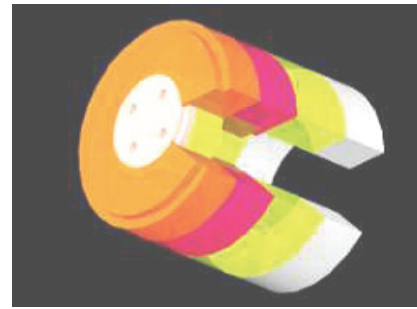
Geometry and dimensions of the extrusion tool used in industrial extrusion process and in numerical simulations.
